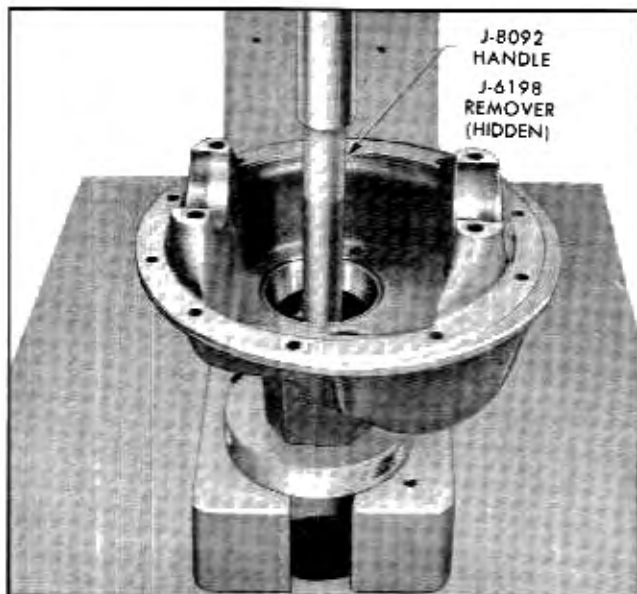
Removing Front Pinion Bearing Outer Race With Remover J-6198 and Drive Handle J-8092
